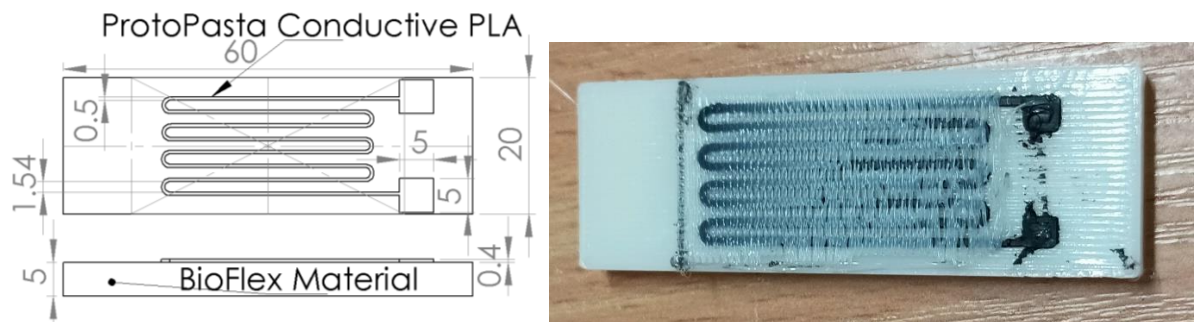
CAD design load sensor for load parallel to plane of strain gauge and actual 3D printed sensor
